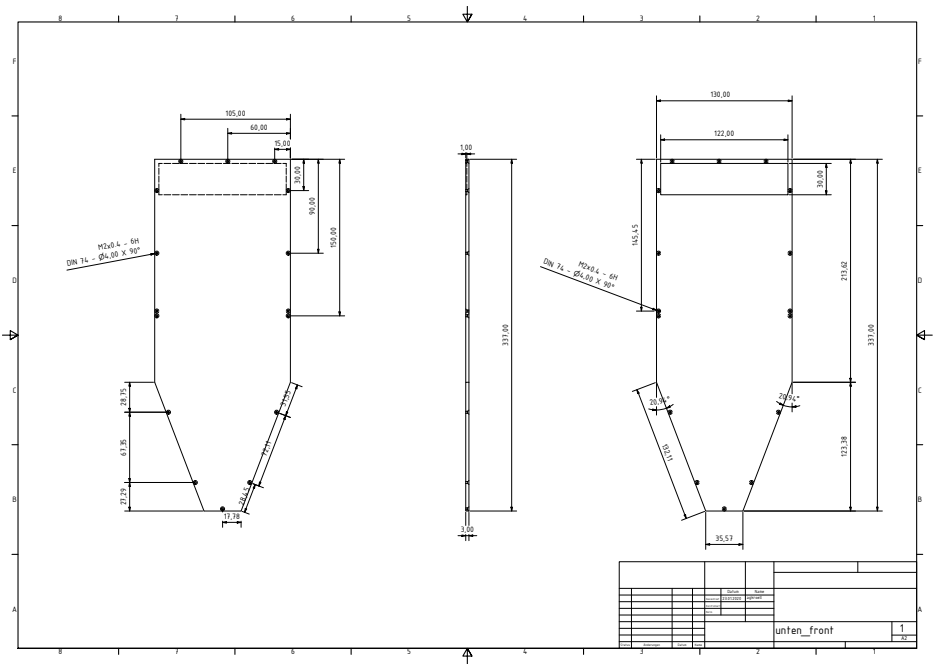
Technical drawing of the bottom plate of a box from the front part of the pair spectrometer.
